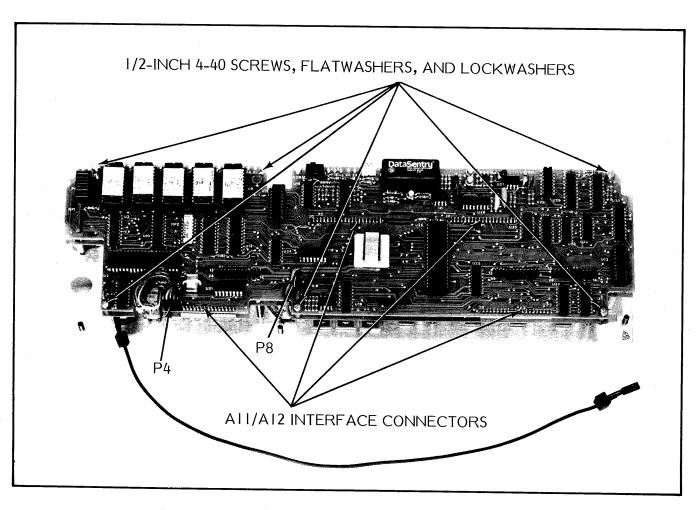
6600A Series Programmable Sweep Generator, Front Panel Assembly
